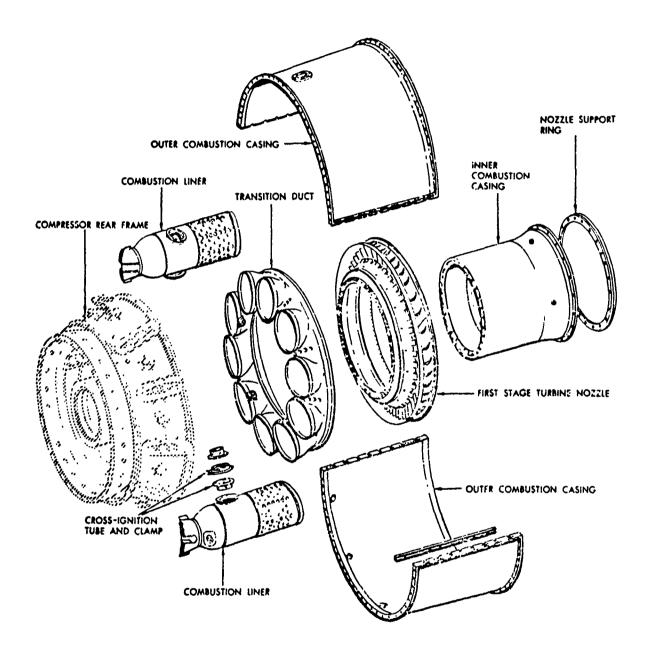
J79 Engine Combustion System, Exploded Pictorial View.
